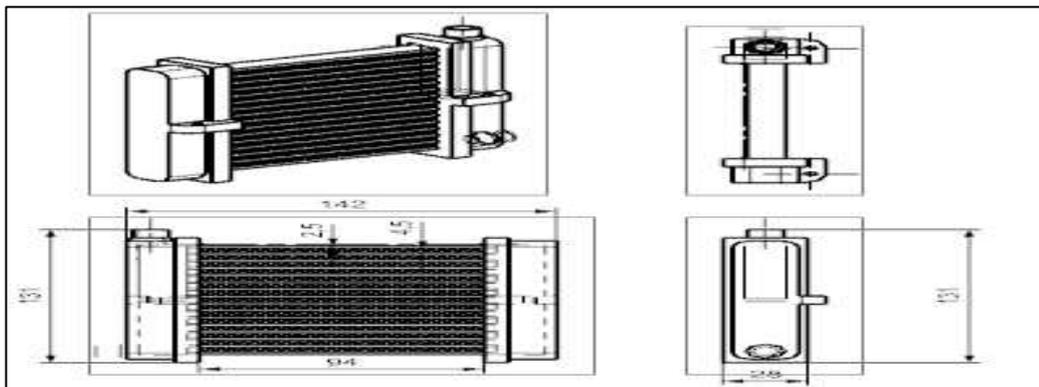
[a]: Flat Plate Heat Exchanger Microchannel Design and Dimensions
